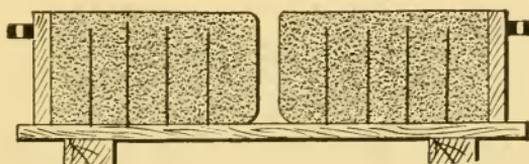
Shows cope of the face plate mold lifted from the drag.
